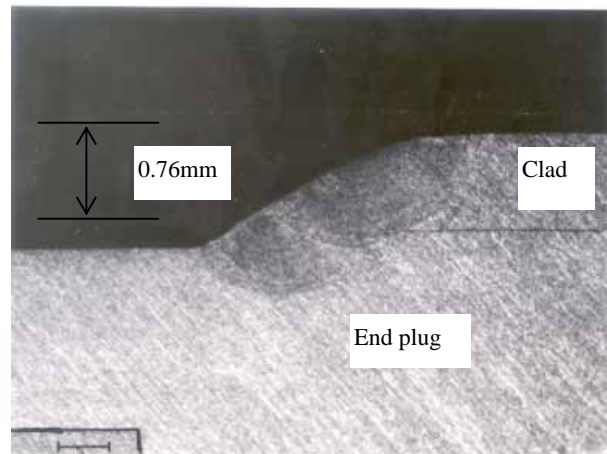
The cross section of the sound bead on end plug and clad welded at optimized condition (60kV, 8.5mA, 740mm/min)
